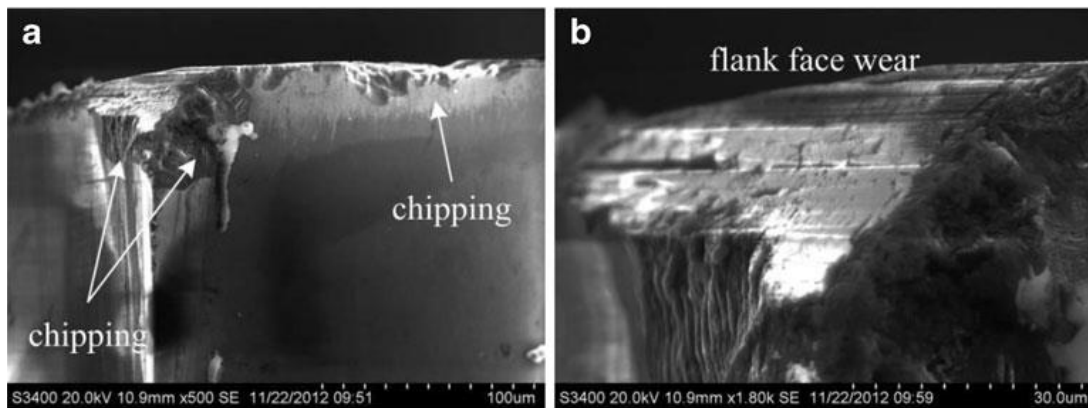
PCD cutting tools (a) tool chipping (b) flank wear on rake face [55].
